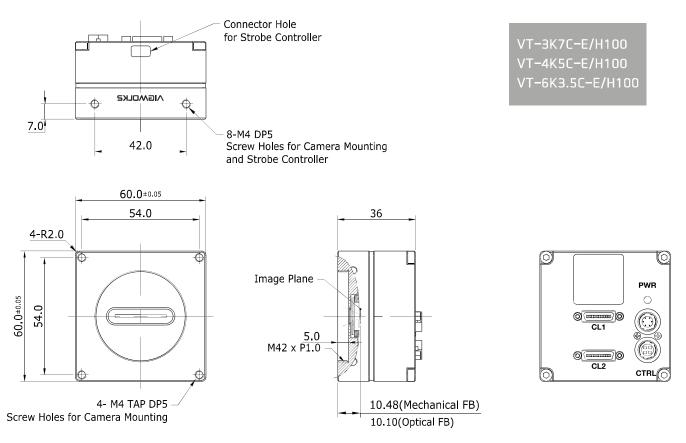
M42 mount based VT CL Series Mechanical Dimension
